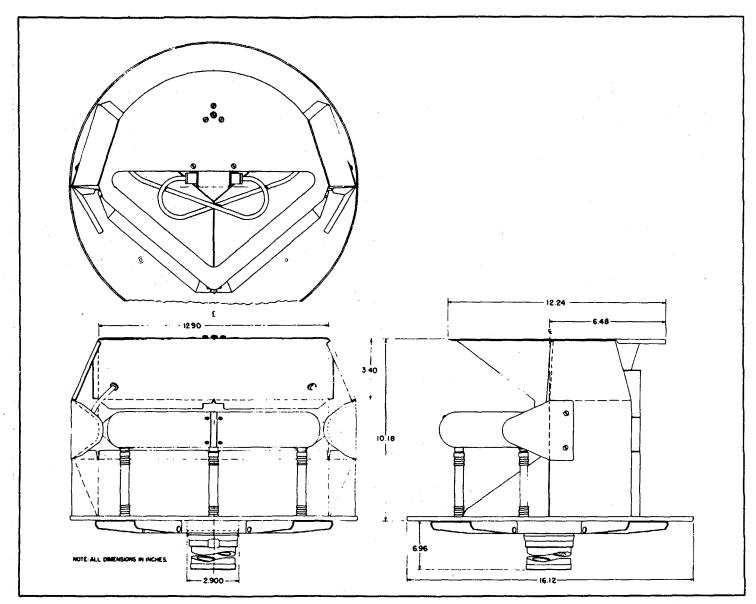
Antenna Assembly AS-435/APA-69, Outline and Mounting Dimensions
